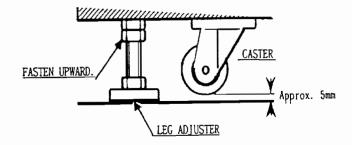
LEG LEVELER AND CASTER, SIDE VIEW
